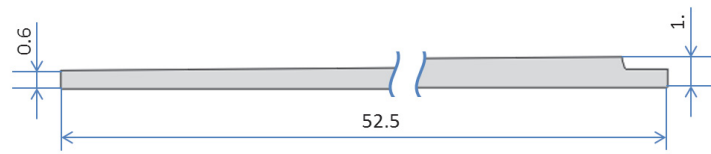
Geometry of the workpiece. (dimensions in mm)
